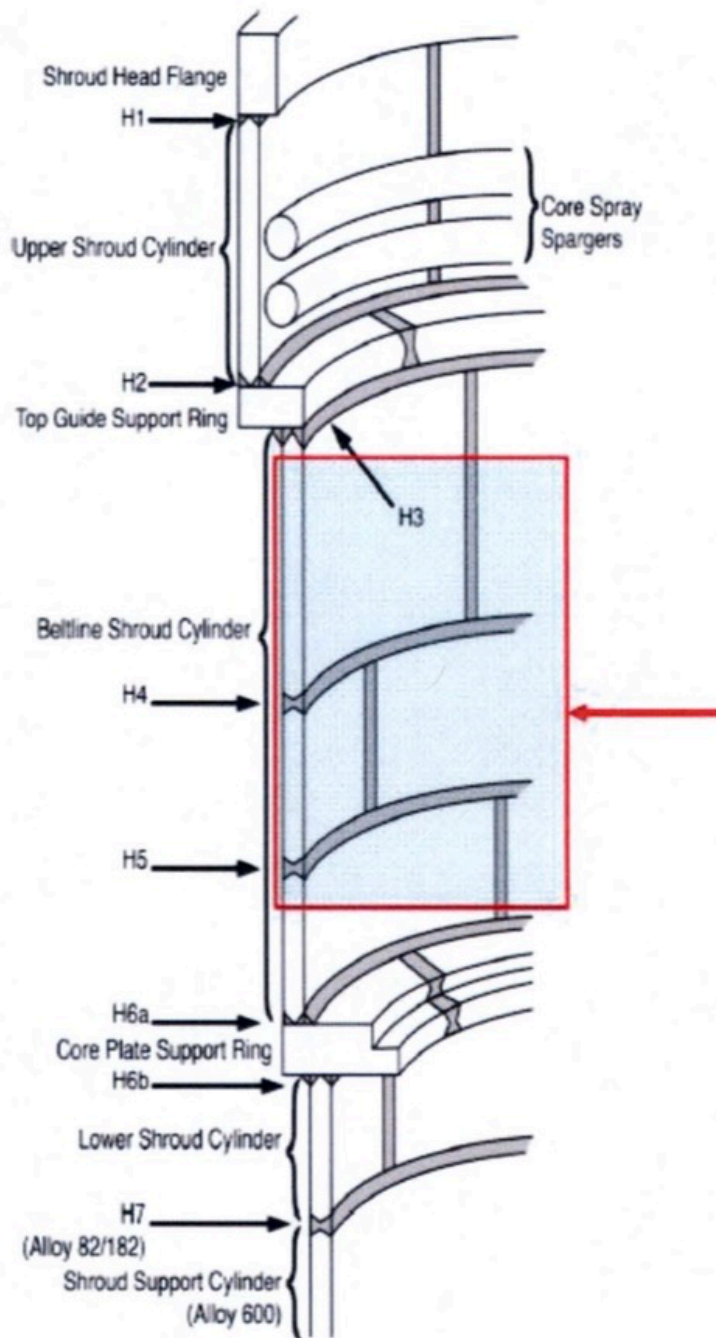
Location of BWR Shroud Welds and Off-axis Cracking. Nearly all off-axis cracking is between weld numbers H3 and H6a, as shown by the arrow. [8]
